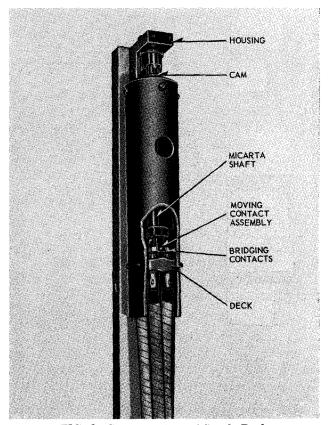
Cutaway View of Single Deck, WSB-1 Tap Changer
